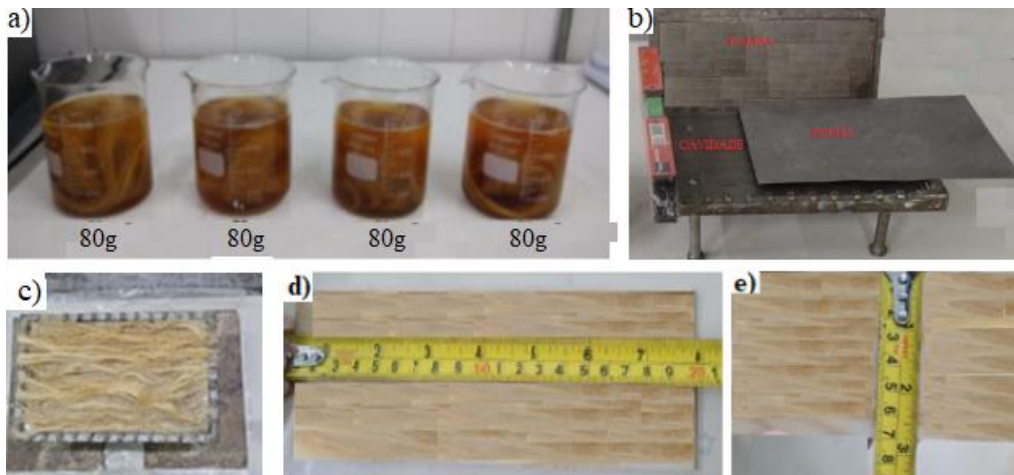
Sandwich faces fabrication: a) alkaline treatment, b) face mold, c) placement of the fibers and resin inside the mold, d) face length, e) face width.
